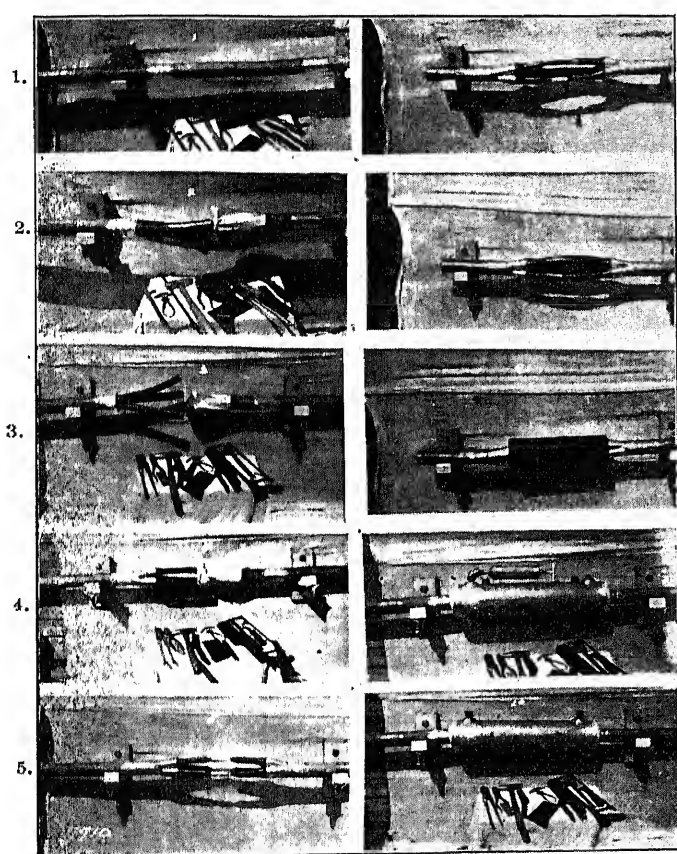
SHOWING STAGES OF CONSTRUCTION
